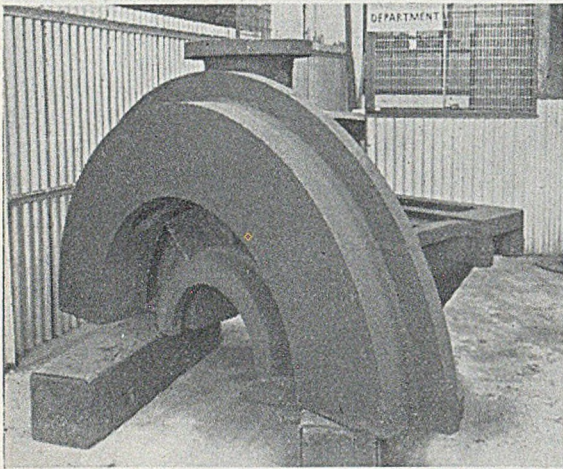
Cores to form the Trunk Side of the Exhaust Casing.
